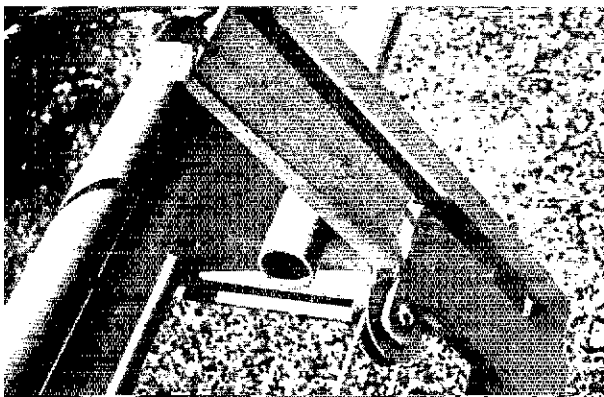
A pulley is sandwiched between two pieces of bar stock and welded to the top of the outside section.
